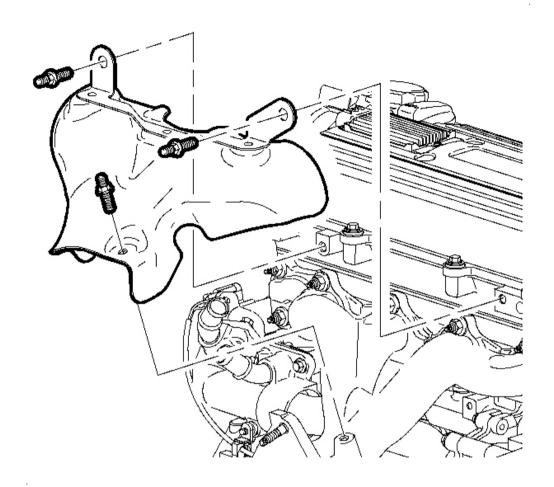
View Of Exhaust Manifold Heat Shield & Bolts Courtesy of GENERAL MOTORS CORP.
